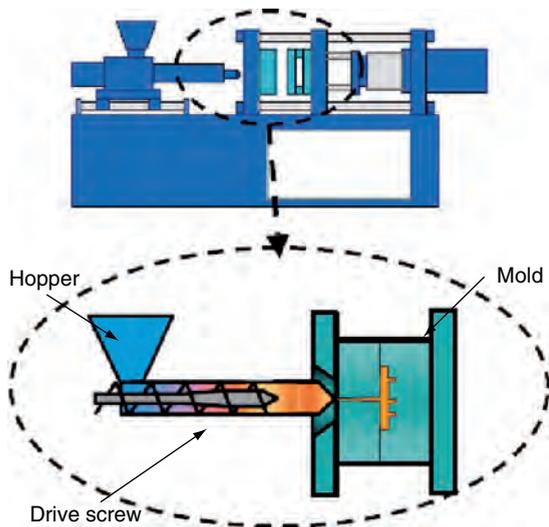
A schematic of a typical injection molding machine showing the hopper, drive screw, and mold. (Source: Becker H, Heim U 2000 Hot embossing as a method for the fabrication of polymer high aspect ratio structures. *Sens. Actuators* 83(1), 130–5. © 2000, reproduced with permission from Elsevier.)
